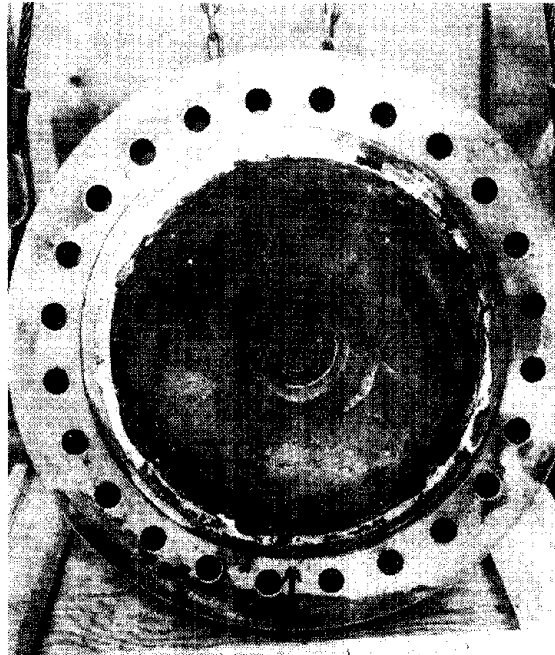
Postfire Front View of HIPPO Miniseal Nozzle Assembly
